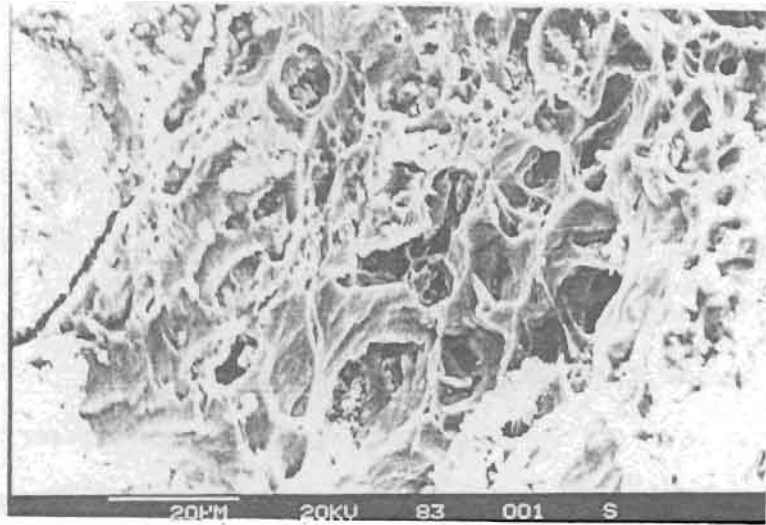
Fractograph of tensile fracture of SSE rod.
